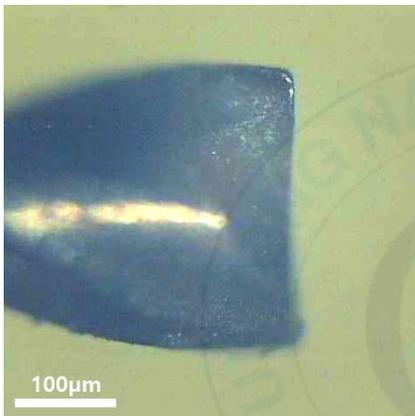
Depth of flank wear at peripheral cutting edge of micro end mill
